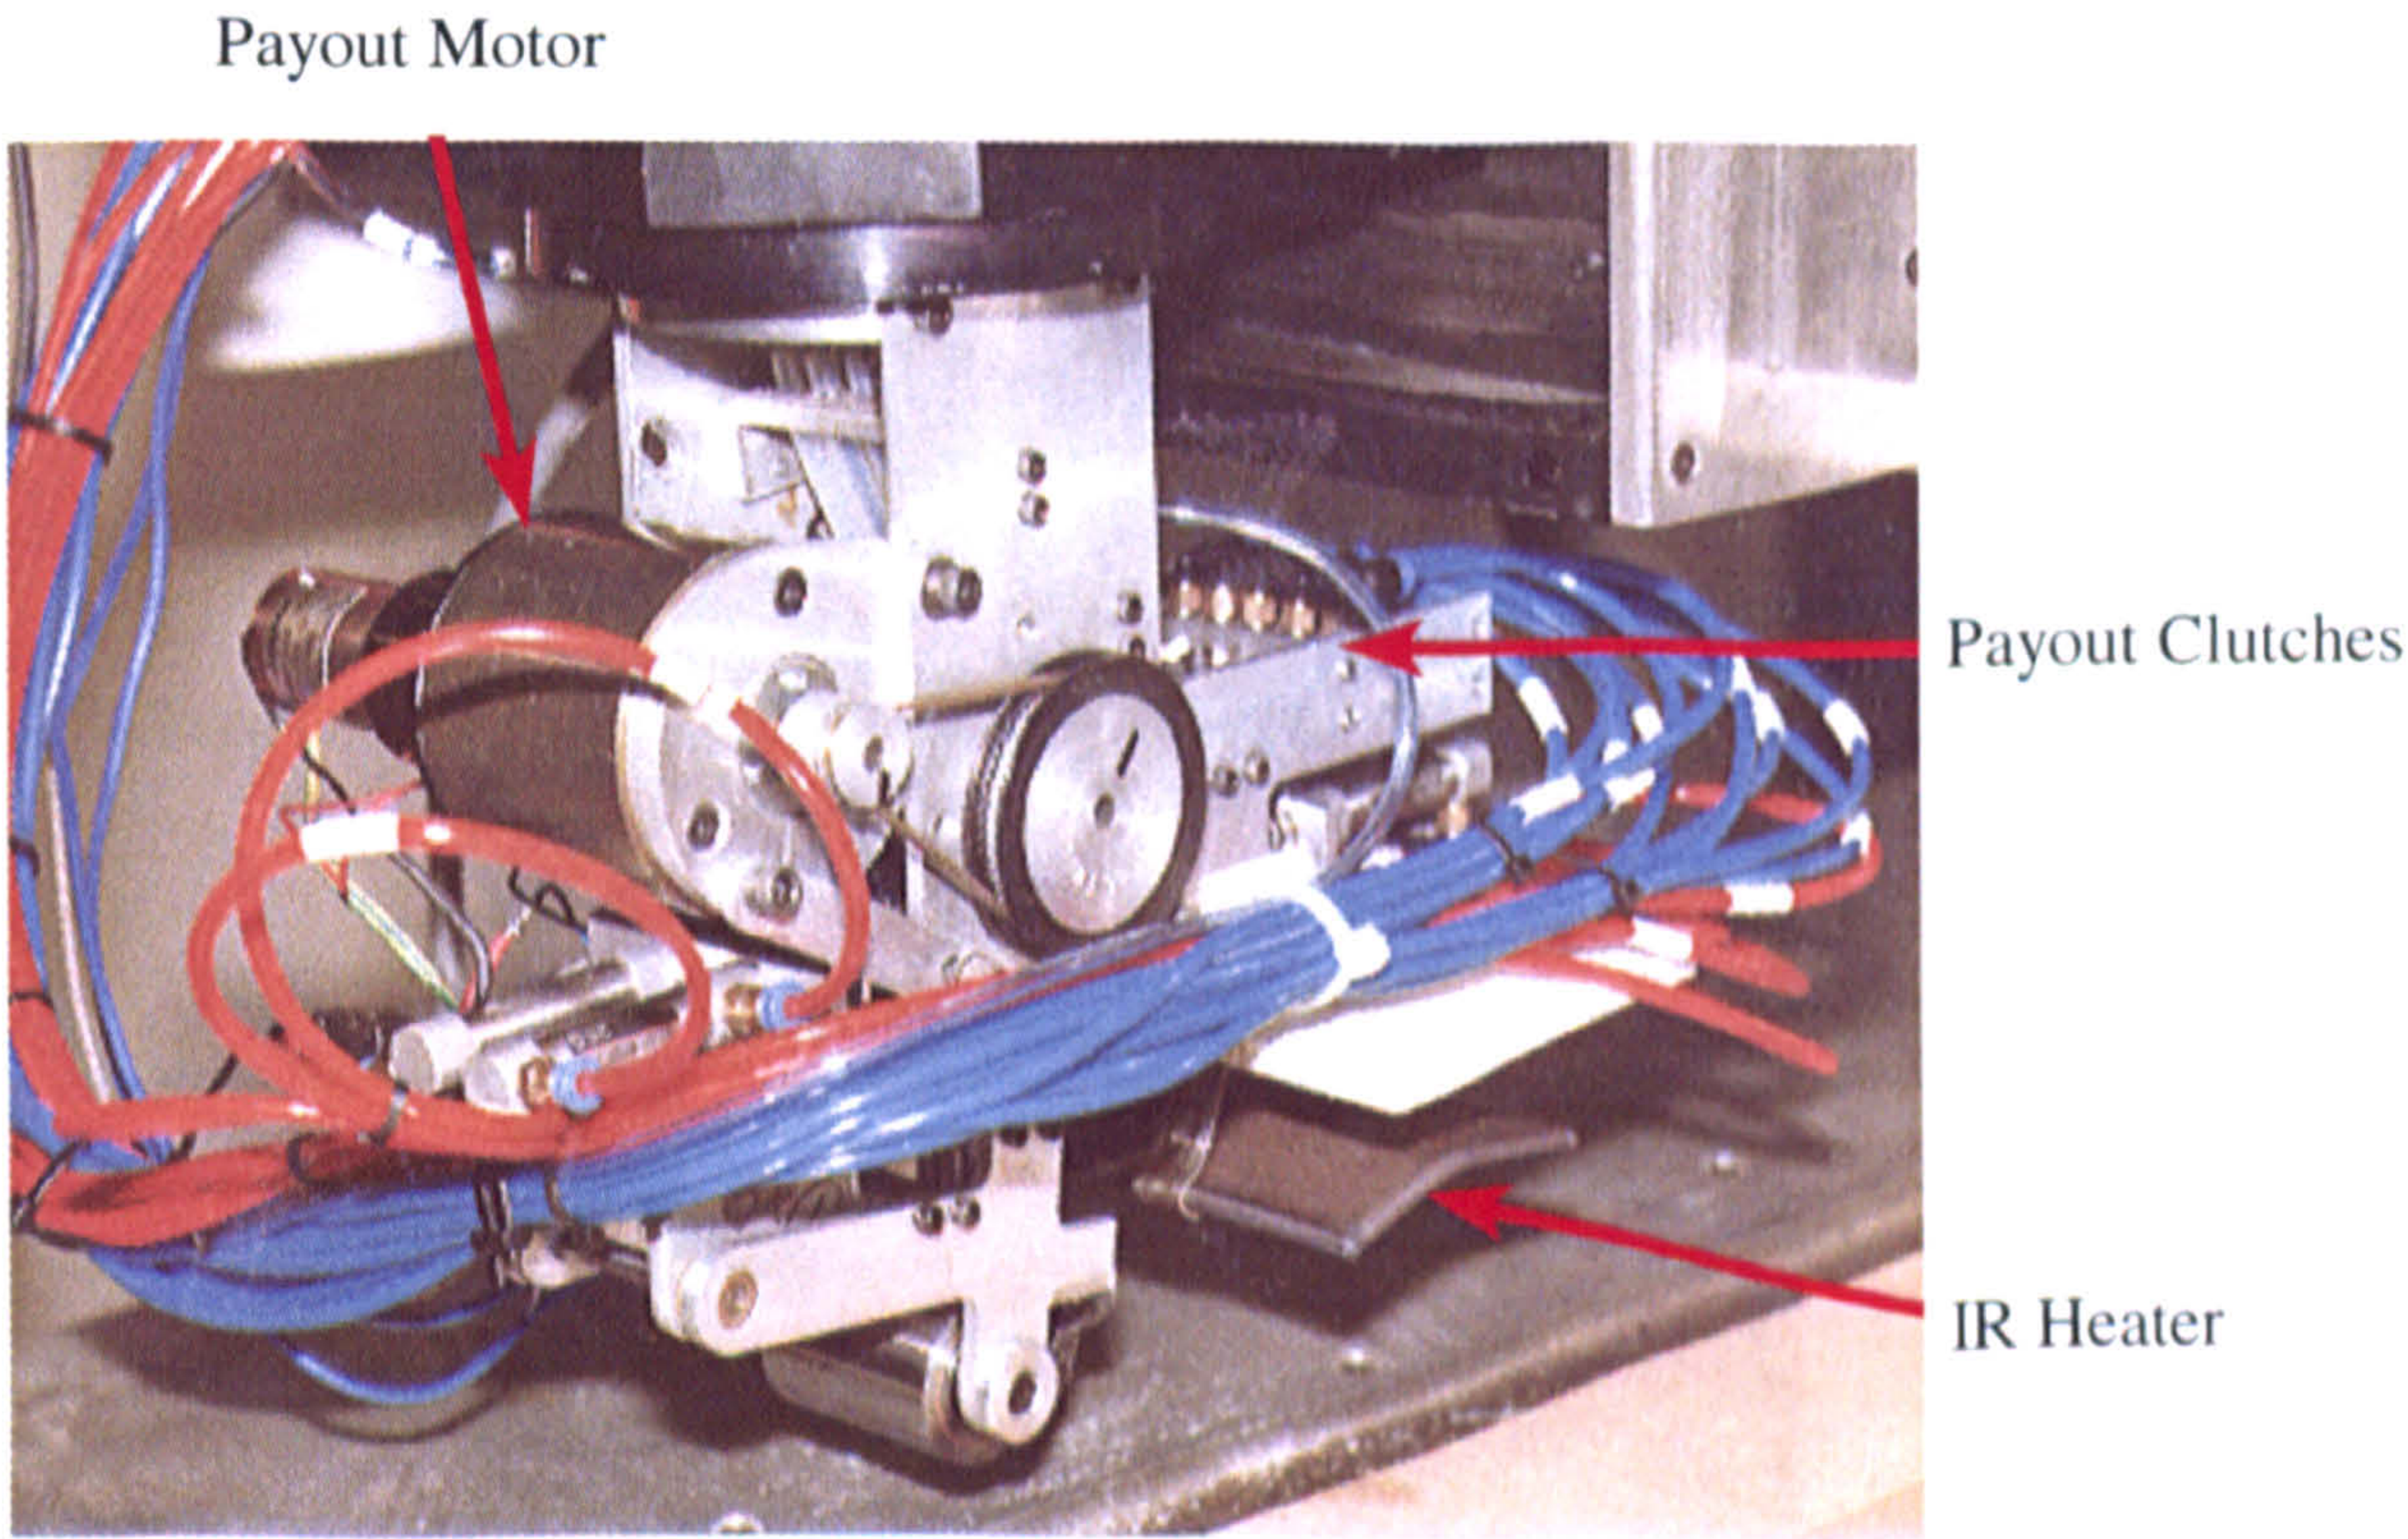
Multi-tow roller placement head showing payout motor and clutches and infra red emitter strip
